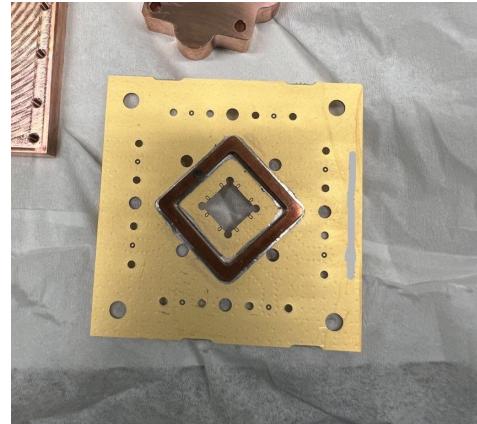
After the soldering was done, the PCB was placed on two pieces of folded aluminum foil.
